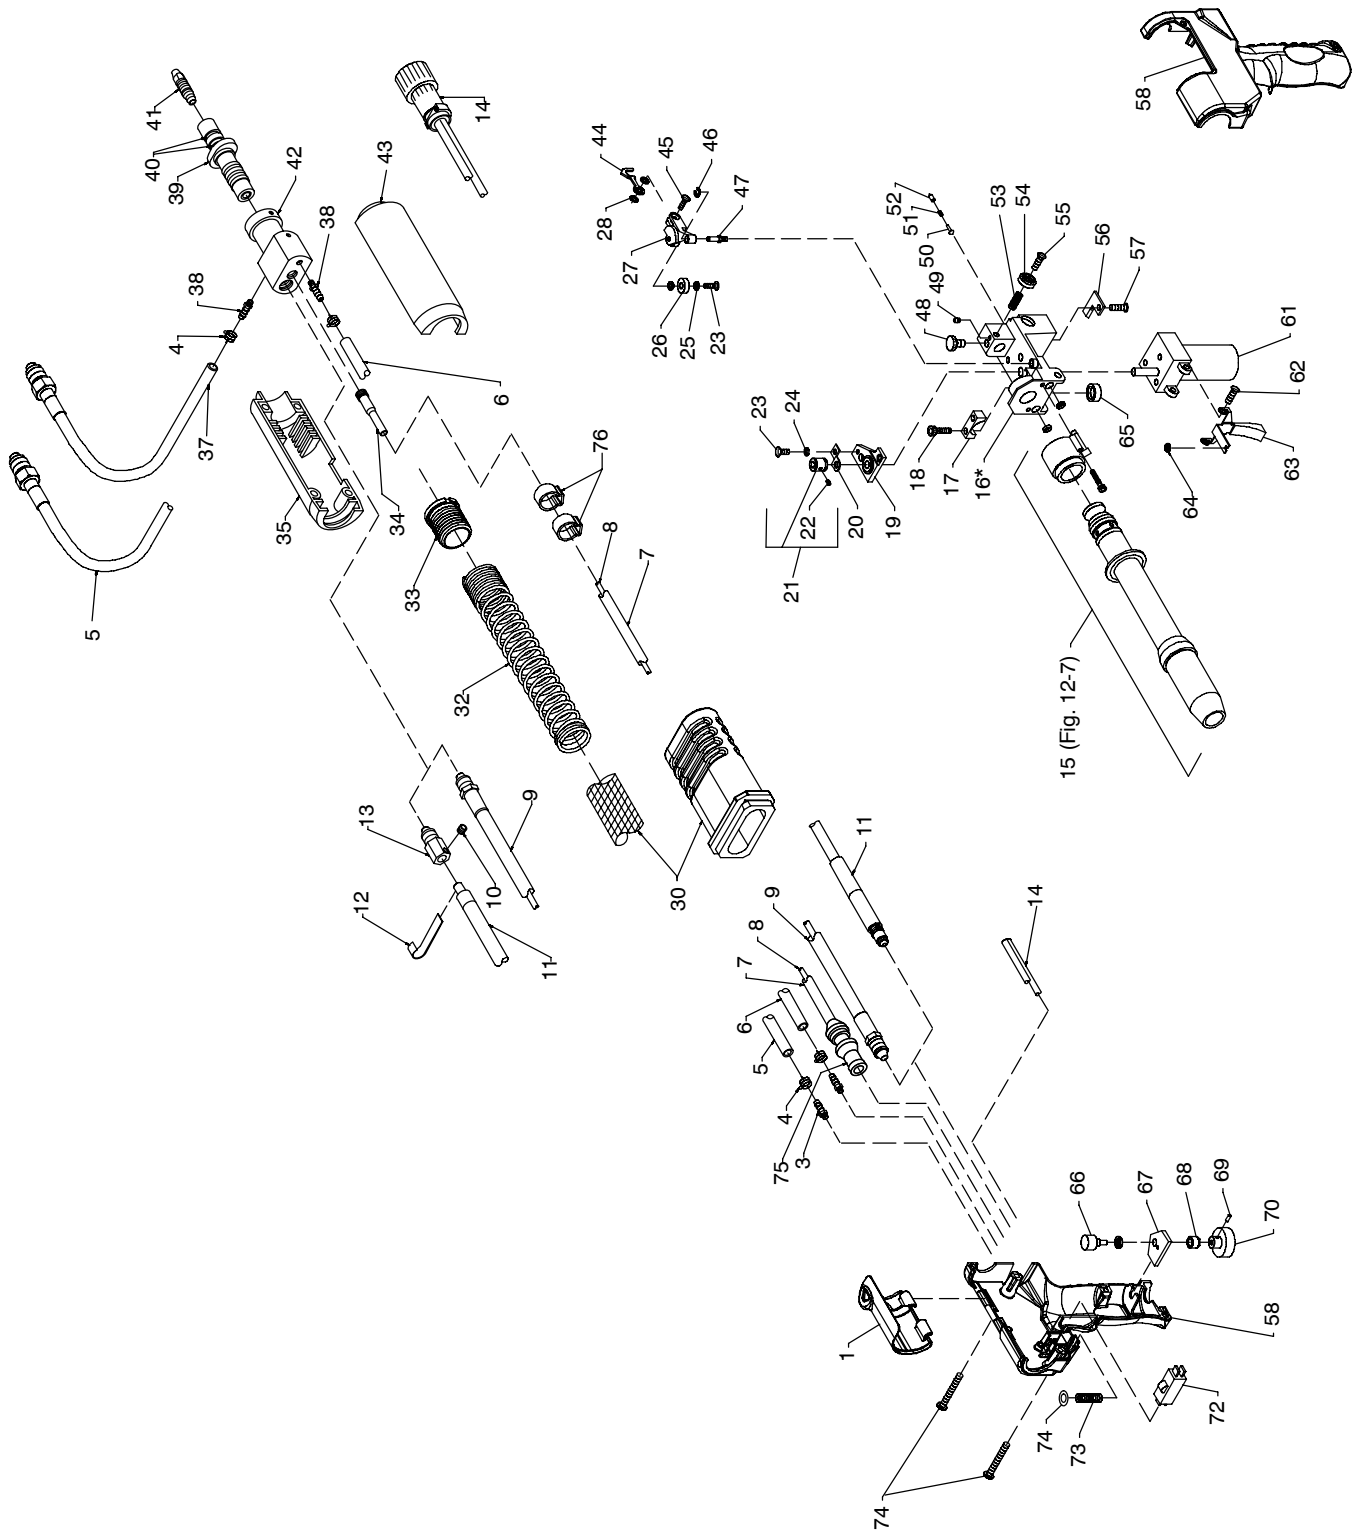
Head Tube Assembly Of XR-Edge Gun (Figure 12-4 Item 43)
